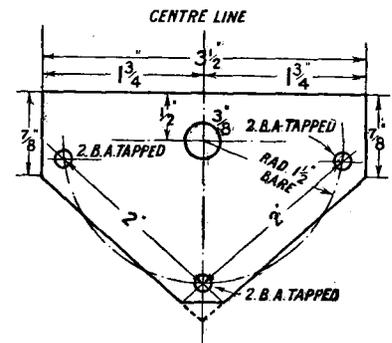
Ebonite top end plates may be constructed as shown above. The measurements given may be modified if necessary.
